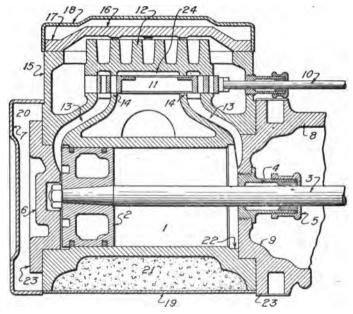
Cylinder and Valve Mechanism Shown in Section
